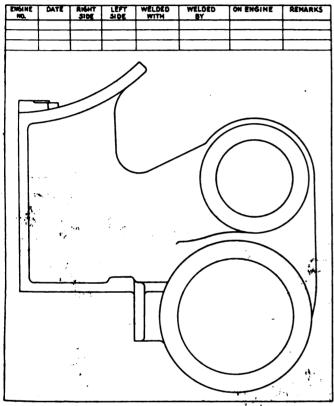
Form to Report Welding Work Performed on the End of a Cylinder
